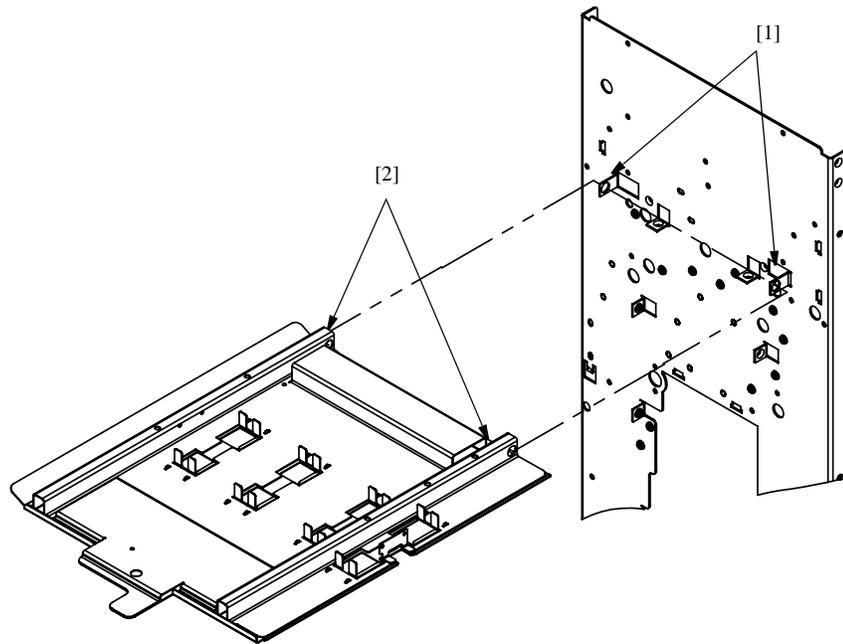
Exploded View of Bypass Panel and Mounting Brackets On the Rear Frame.
